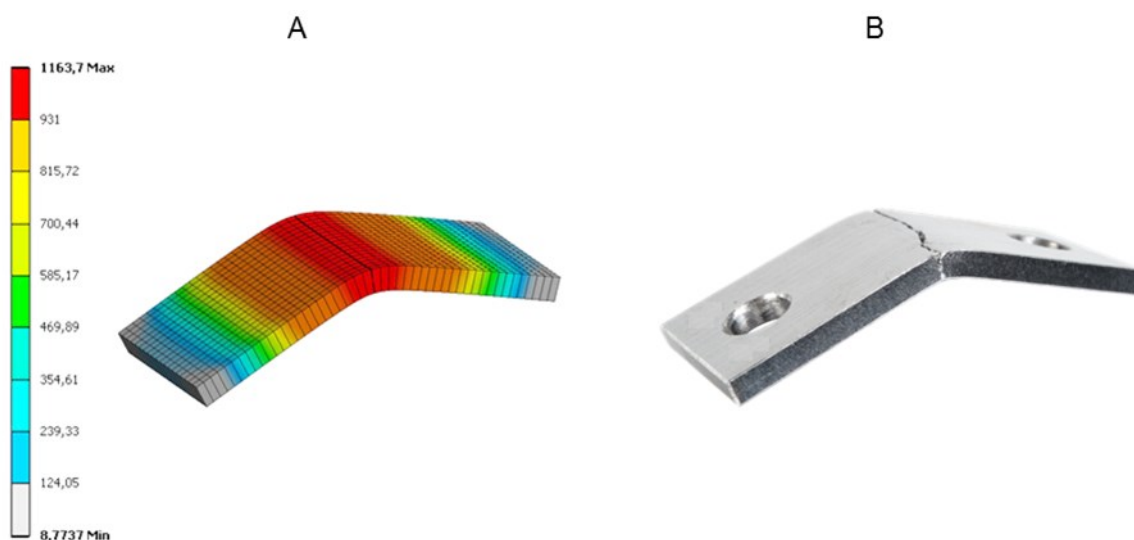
Calculated tensile stress in 1.7218 U-bend coupon just before the break point (A) and appearance of the broken coupon (B)
